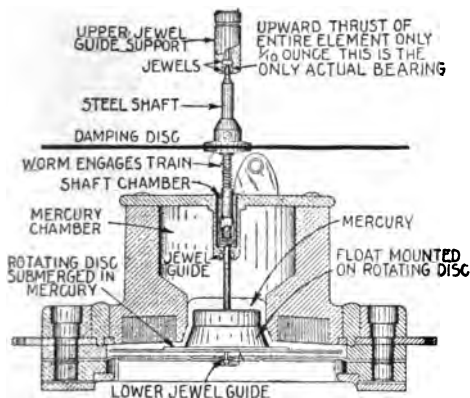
,803.—Sectional view of Paraday disc or mercury motor ampere hour meter as made by Sangamo Electric Co. The illustration does not show the magnets and indicating mechanism.
